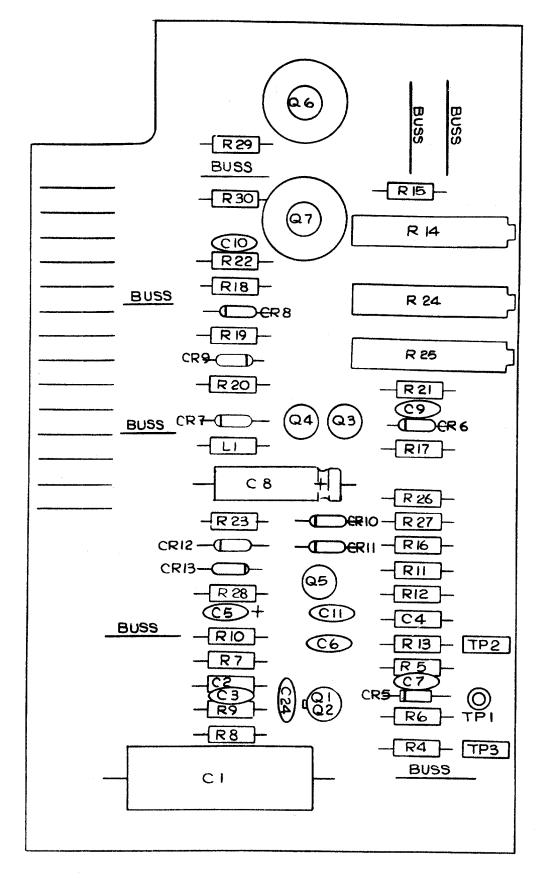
Models 251 and 501A Amplifier Board Assembly Parts Layout, Dwg. No. 620-210-00
